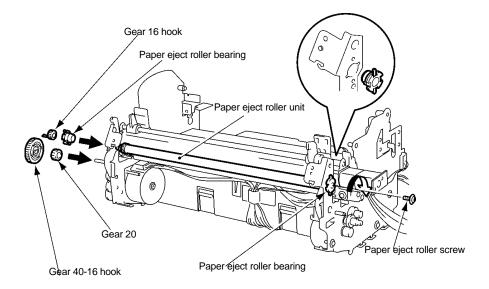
Installing the Paper Eject Roller Unit (2)
